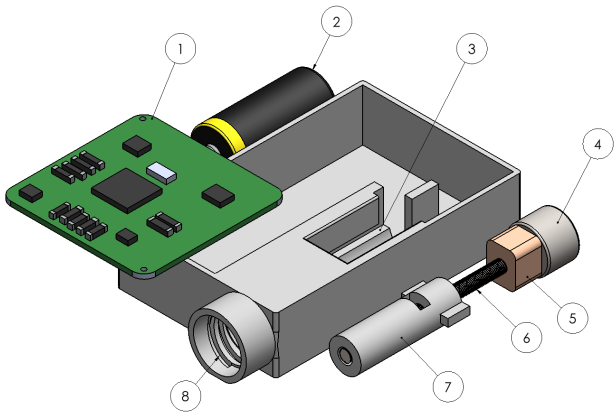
CAD design of the traditional insulin pump with key components labelled
